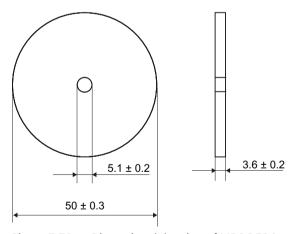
Dimensional drawing of MDS D526 All dimensions in mm
